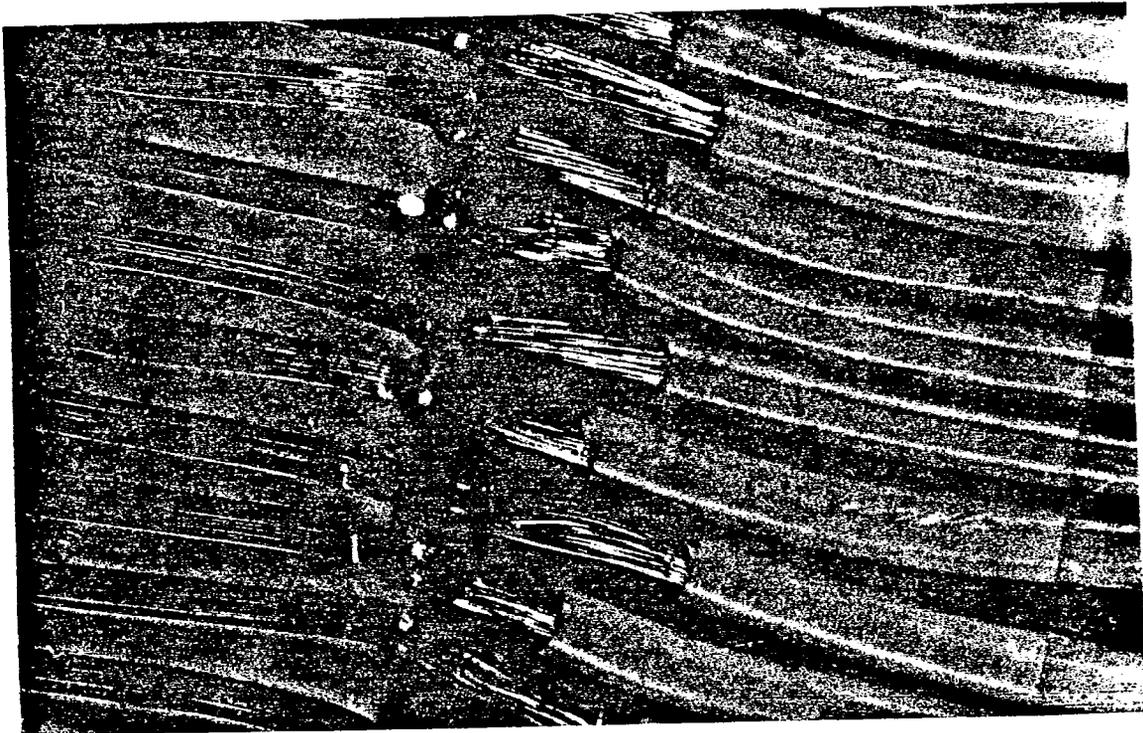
TIG welding transition - FCC to RWC (Dynatech Corp.).
